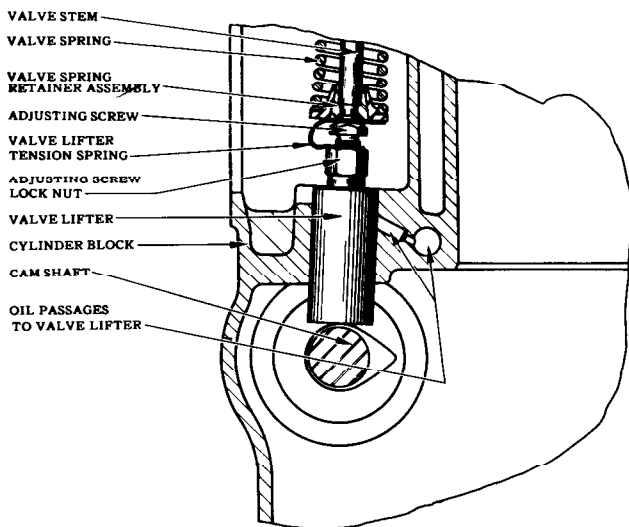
Illustration No. 2—Valve Push Rod Assembly—J-15 Models
